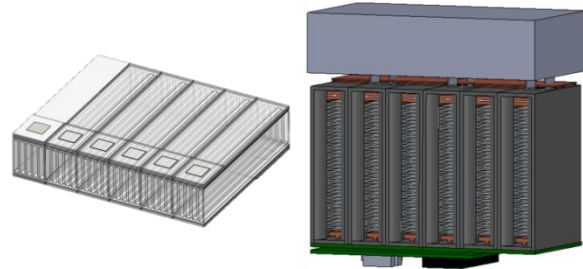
Schematic of module-level heat exchanger (left) with devices (six on top, six on bottom), and six-module inverter (right), including module casing, capacitor, bus bars, control board, and gate driver board. Computational fluid dynamics and experiments were conducted on the sub-module heat exchanger (opaque portion on far left of module-level heat exchanger).
